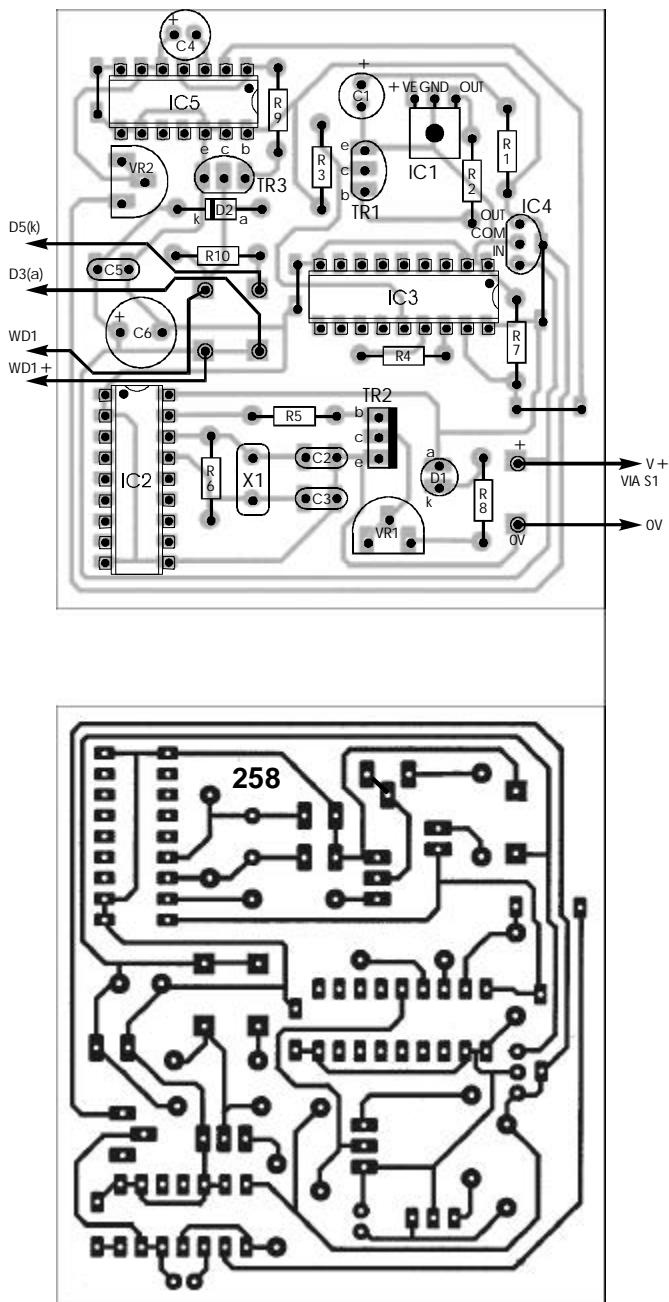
Printed circuit board topside component layout and (top right) approximately full-size underside copper foil master.
